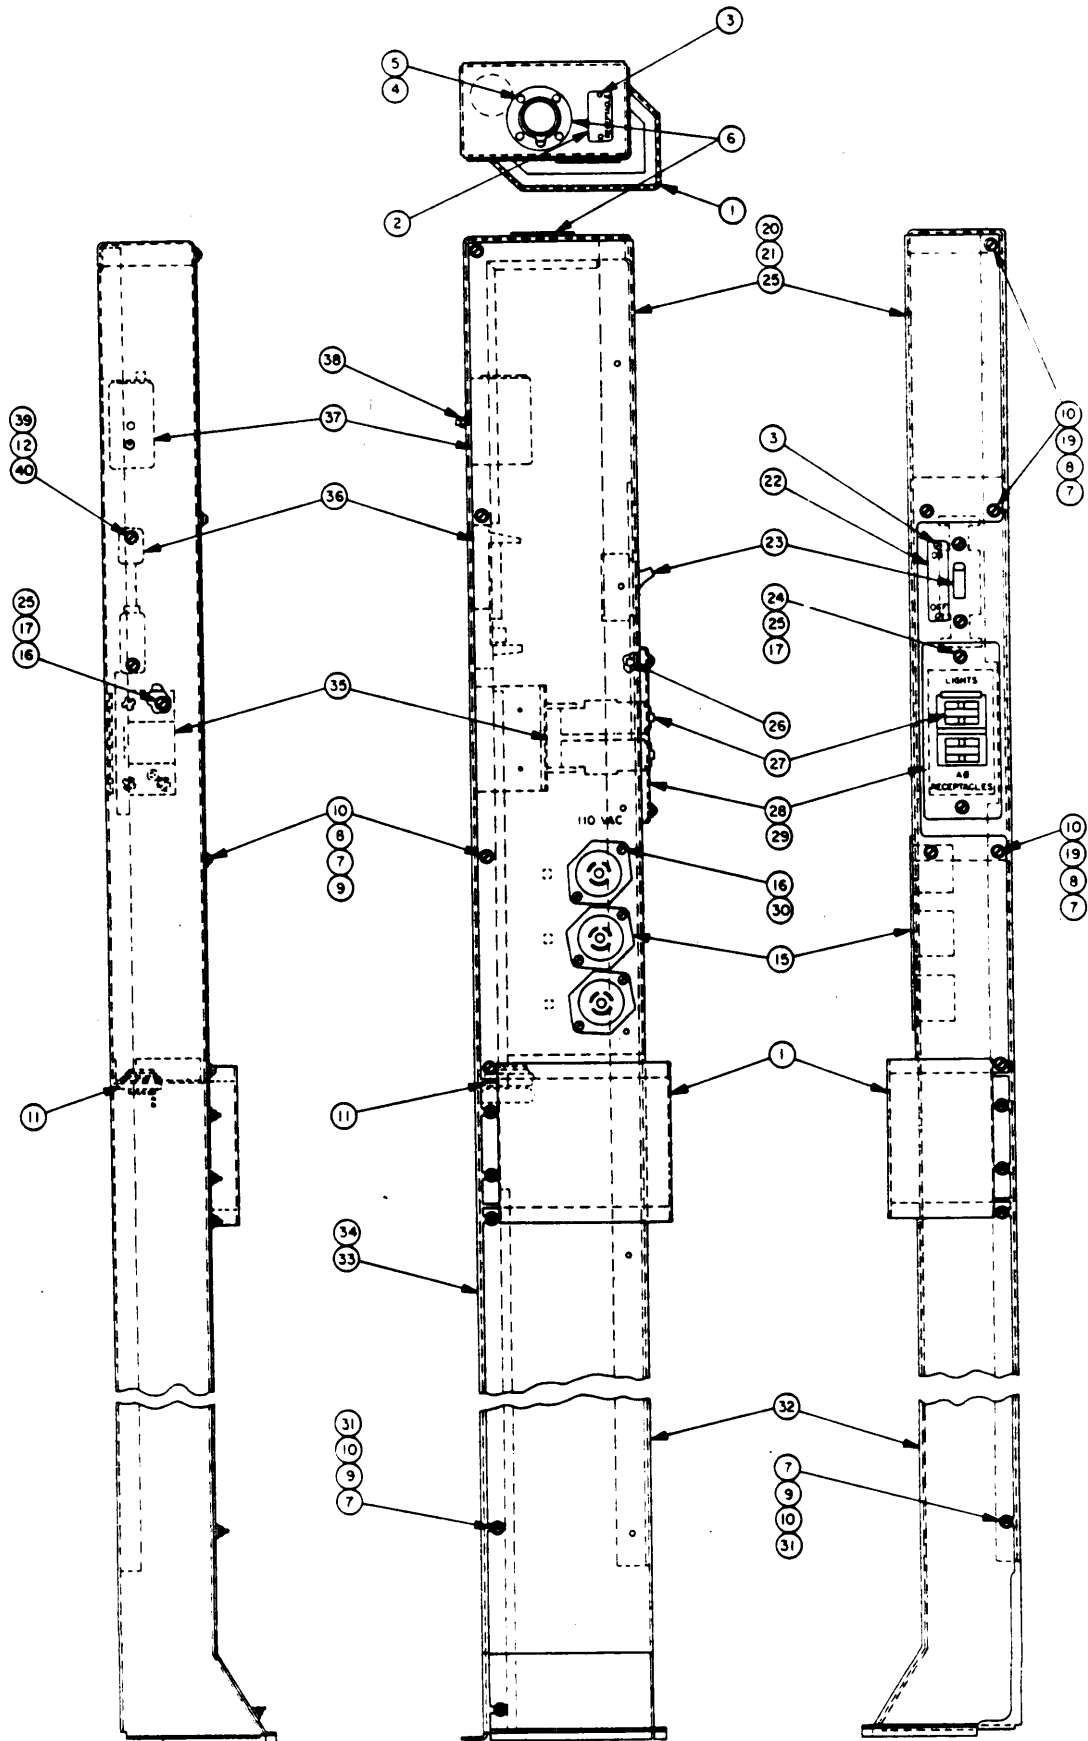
Duct Assembly, Electrical (Sheet 2 of 2)
